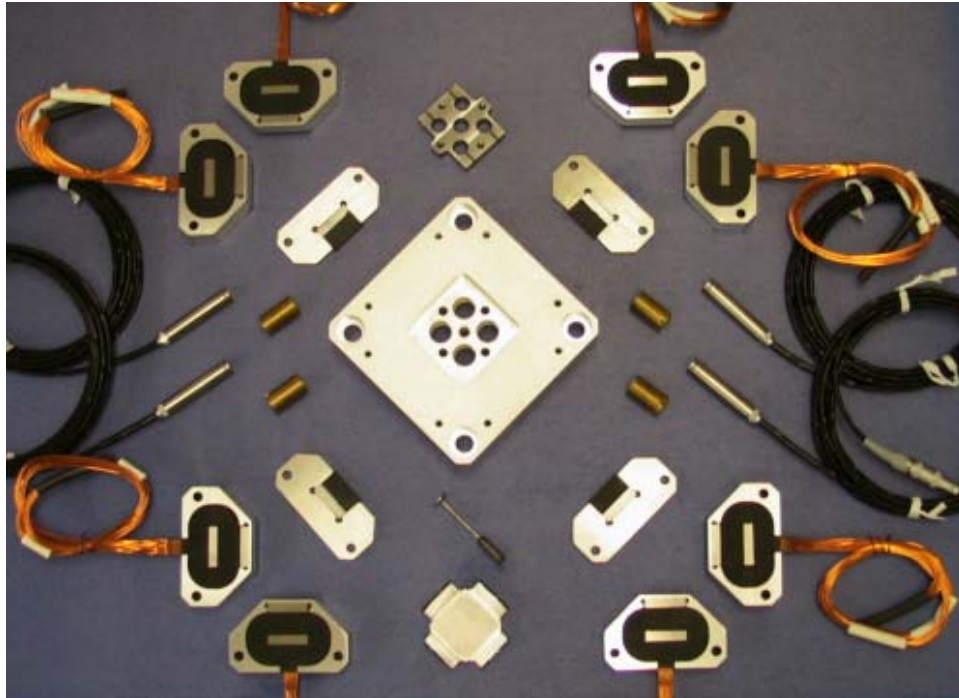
The complete set of fabricated AFSM components, prior to final assembly.
